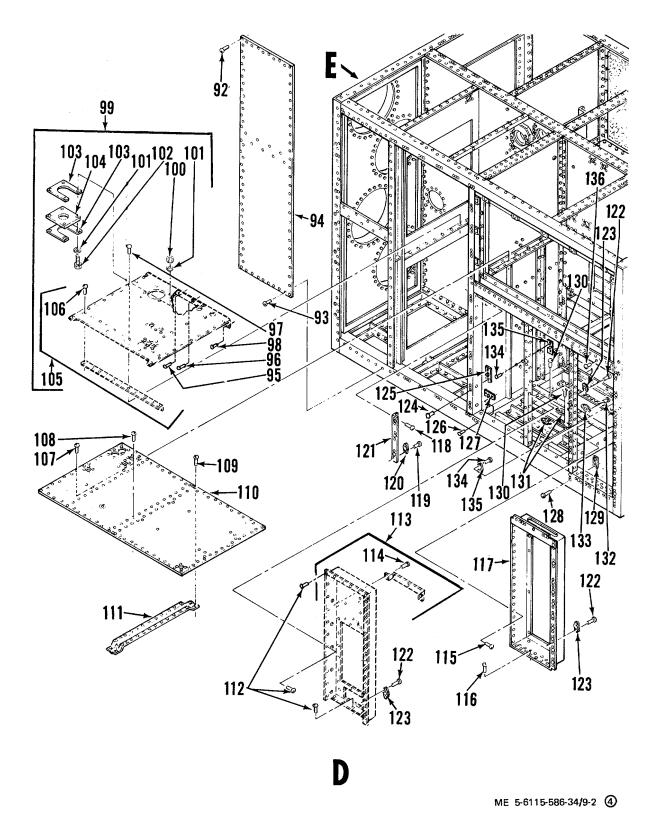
Shell assembly, exploded view. (sheet 4 of 9)
